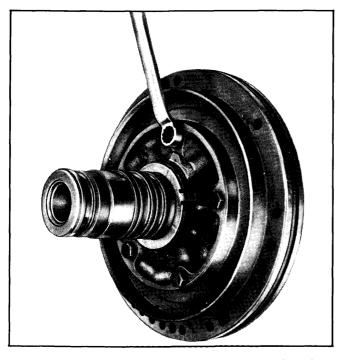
Removing Pump Cover to Pump Body Bolts
